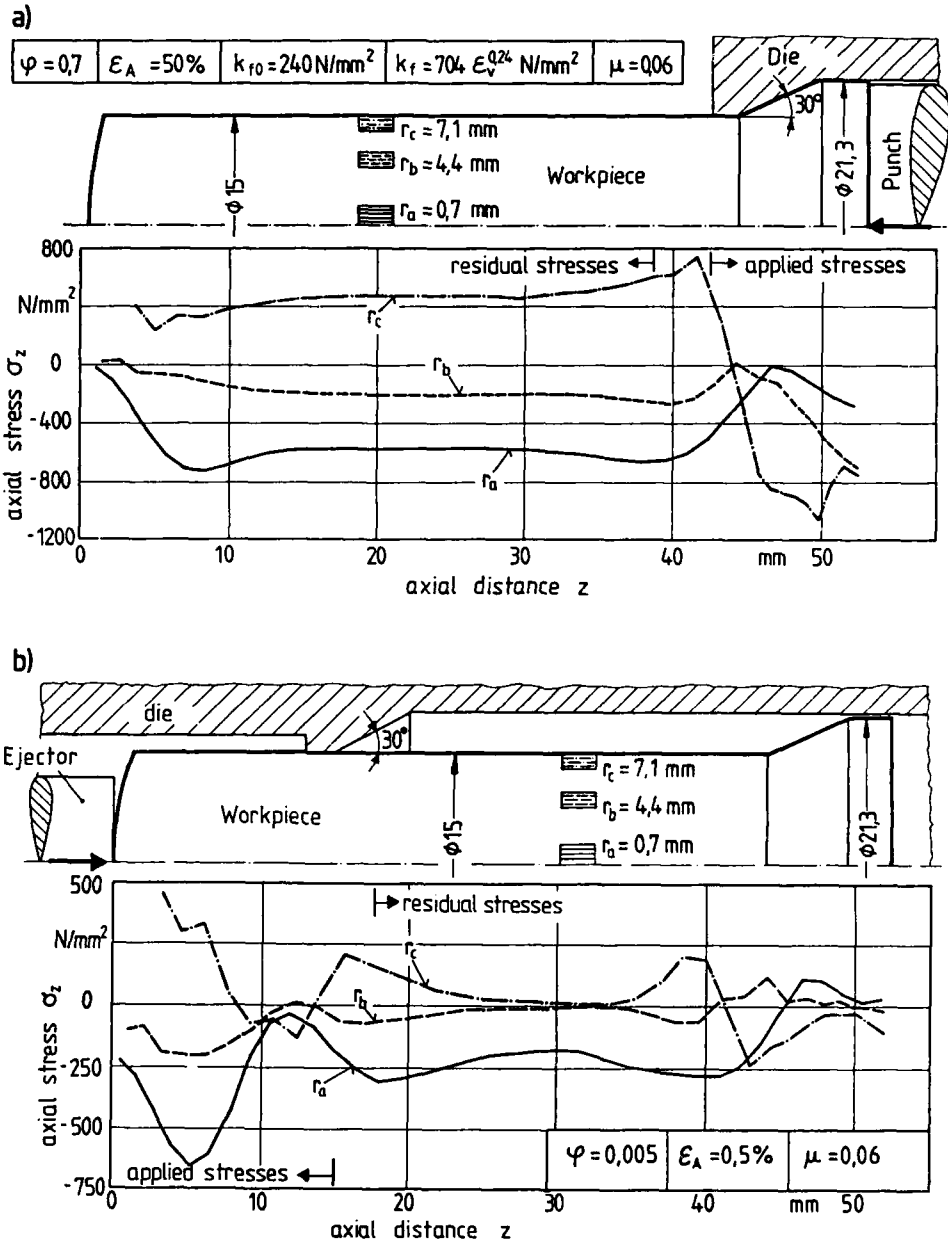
a) Axial stresses in a workpiece during extrusion.
